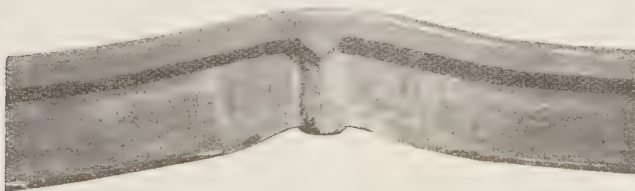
ter. — Thermit-fusion weld on new French standard 46-kgr. (92.7 lb. per yd.) rails, the head of which was hardened after rolling. The weld was annealed and heat-treated to restore the hardness in the rail head, removed by welding.
